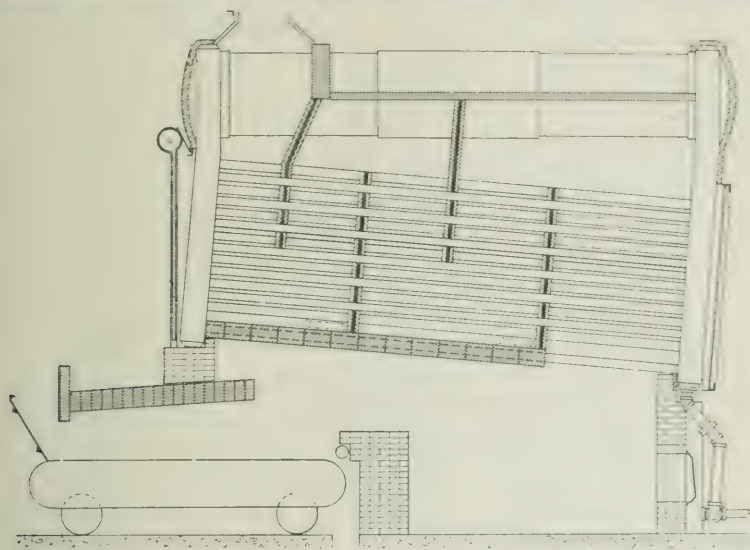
Edge Moor boiler with tile furnace and five gas passes.
